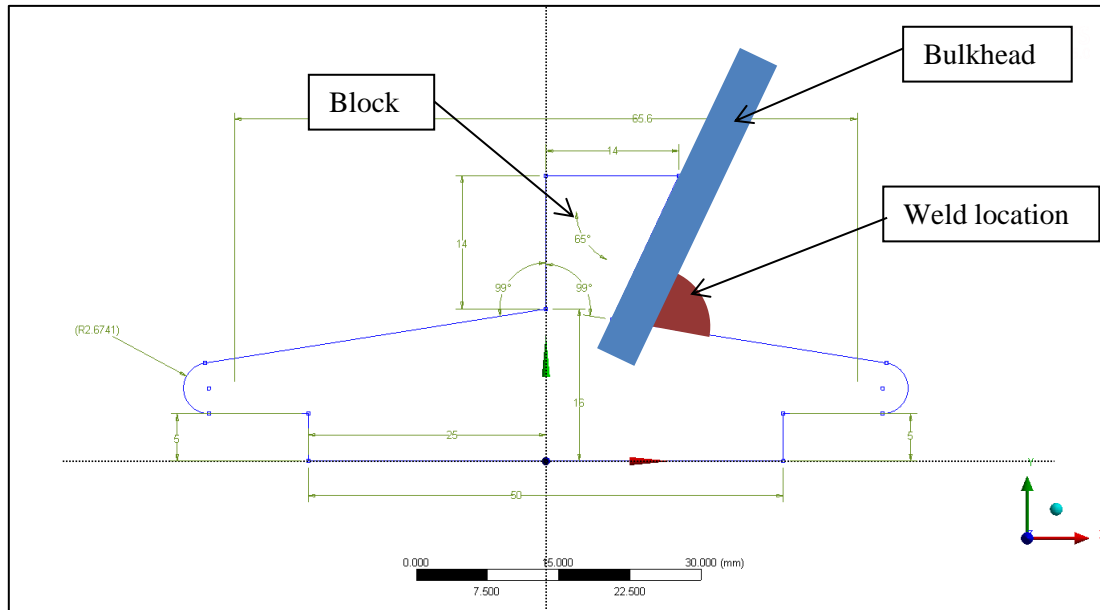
Band extrusion profiles for GRW tanker J2580 (dimensions approximate) with bulkhead and weld location shown
